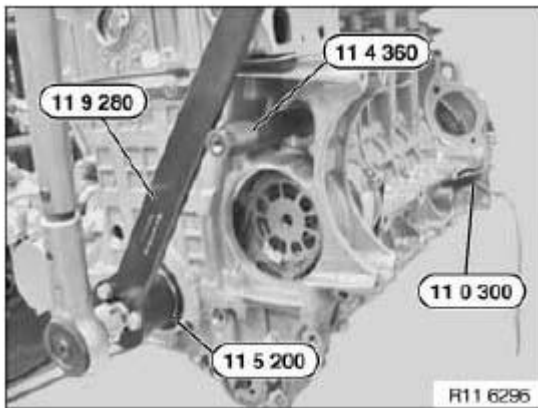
Identifying Special Tools (11 9 280), (11 5 200), (11 4 360) And (11 0 300)
